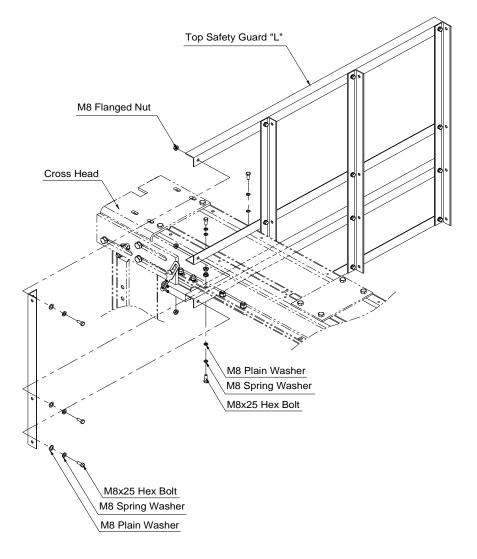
A. CAR TOP SAFETY GUARD (LEFT SIDE) INSTALLATION (Underslung Fork type)
